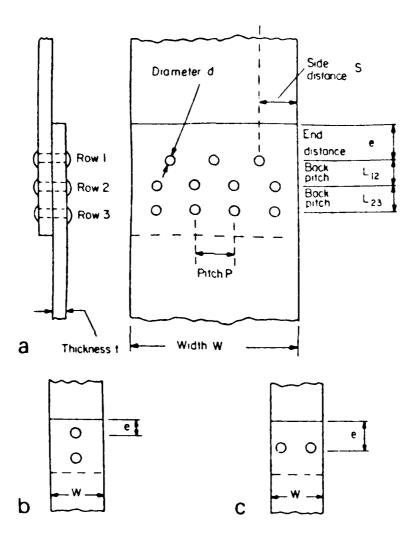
DEFINITION OF JOINT GEOMETRY: A) ROWS OF RIVETS (ROWS 1 AND 2 ARE STAGGERED, ROWS 2 AND 3 ARE IN UNIFORM RECTANGULAR PATTERN); B) 2 RIVETS IN TANDEM (LINE OF RIVETS); C) 2 RIVETS IN PARALLEL (ROW OF RIVETS) (REF. 92)
